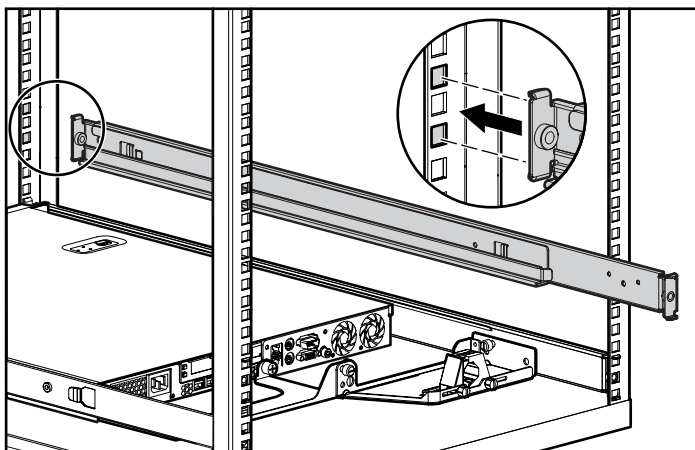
Aligning and inserting the fixed rack rail (rear view)
